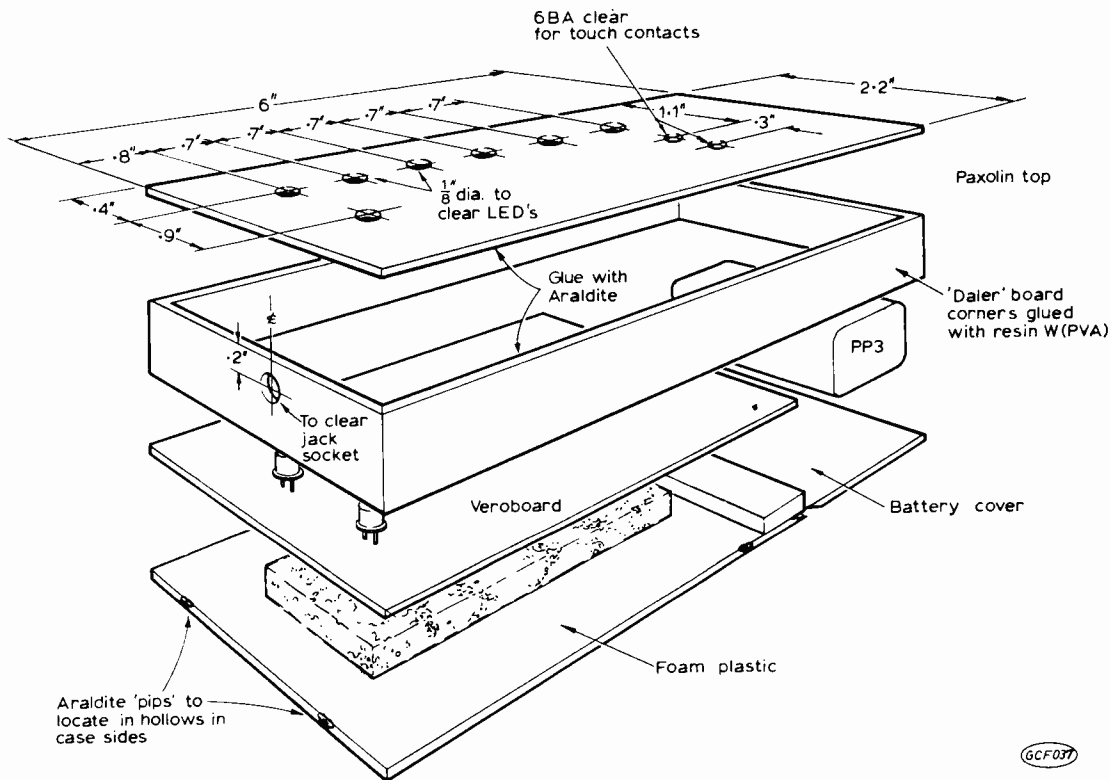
Construction of the case, the sides and bottom being made from Daler board and the panel from paxolin.
